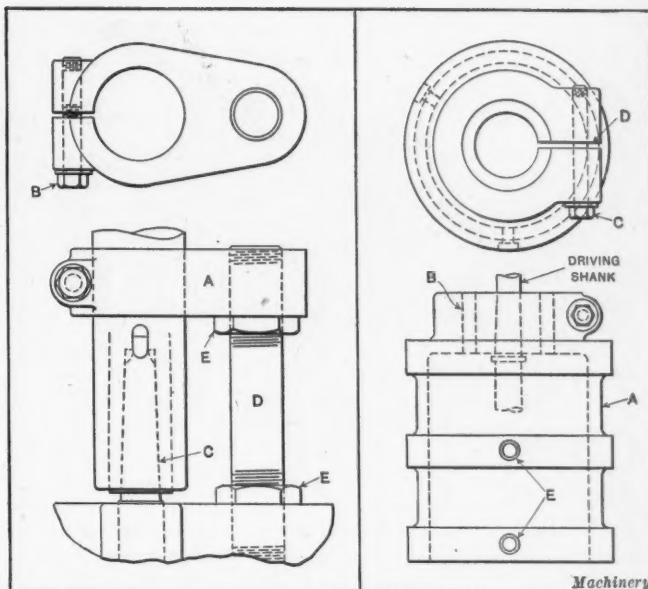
Method of mounting Spiral-drive, Fixed-center Drill Head
